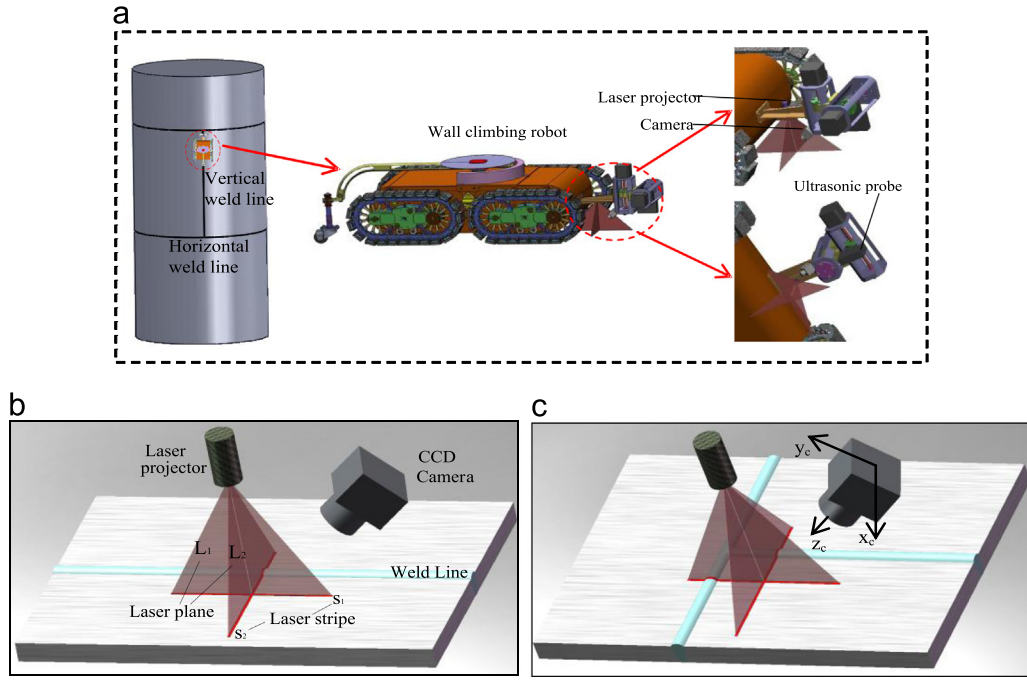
Weld line detection and tracking system. (a) The platform. (b) The CSL projector and imaging CCD on straight weld line, and (c) on cross weld lines.
